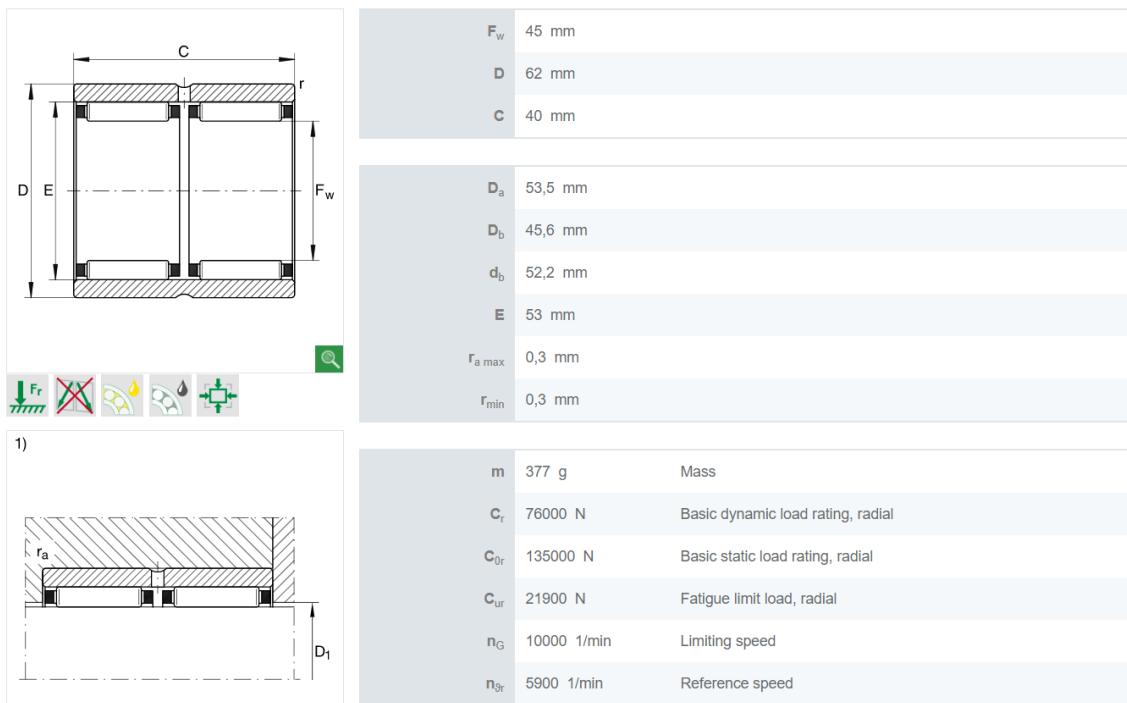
RNAO 45x62x40 Technical specification [13].
